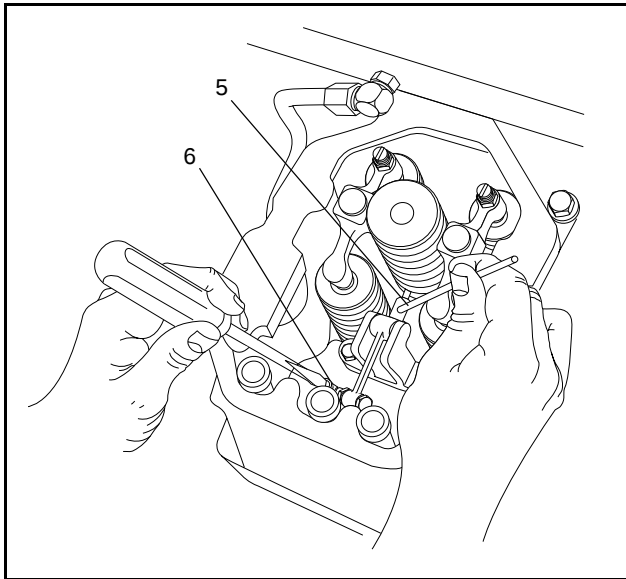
Typical Example Of Location For Gauge And Control Rod Adjustment (Rocker Shaft Removed For Illustration)
